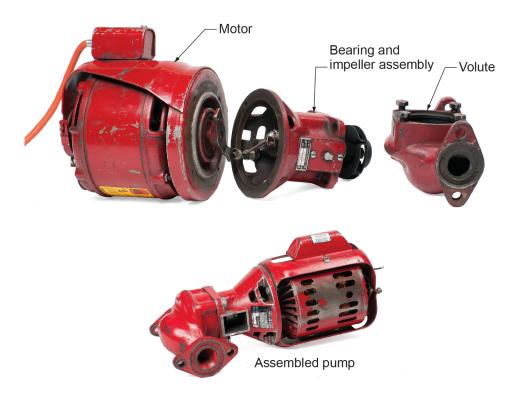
Three-piece circulator. (Skilled Trades BC, 2021) Used with permission.
